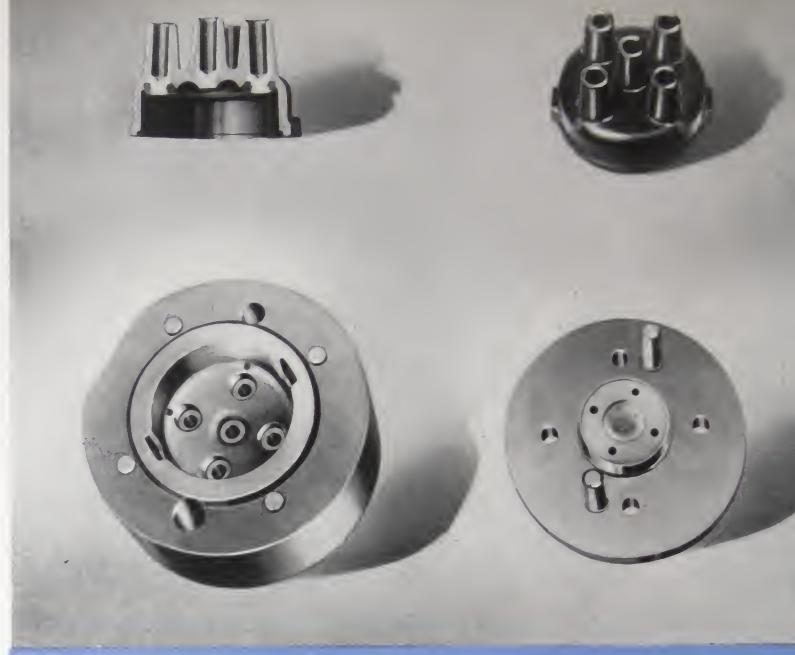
"Overflow" mold for automobile distributor head and finished part
